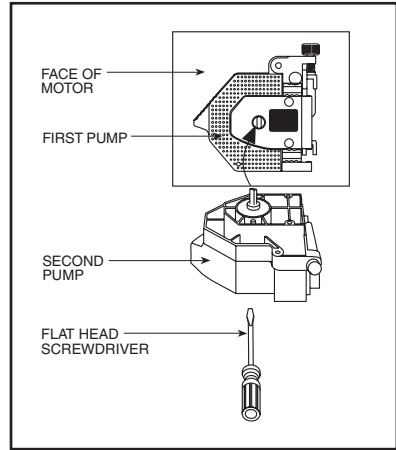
Aligning the Rotor Shaft of the Second Pump
